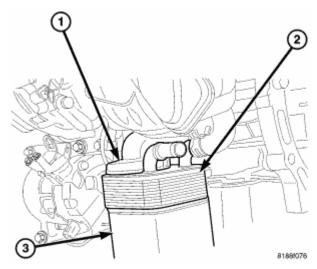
OIL COOLER Courtesy of CHRYSLER LLC
